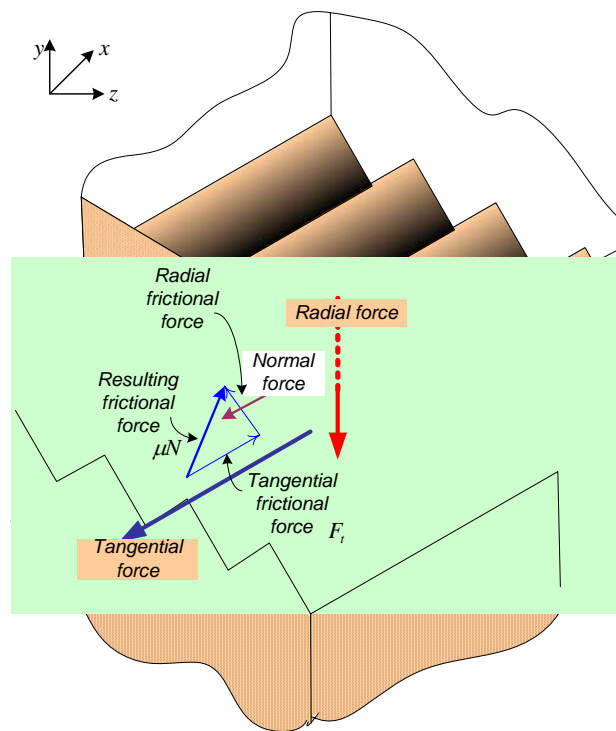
Equilibrium of forces on grooved roller surfaces
